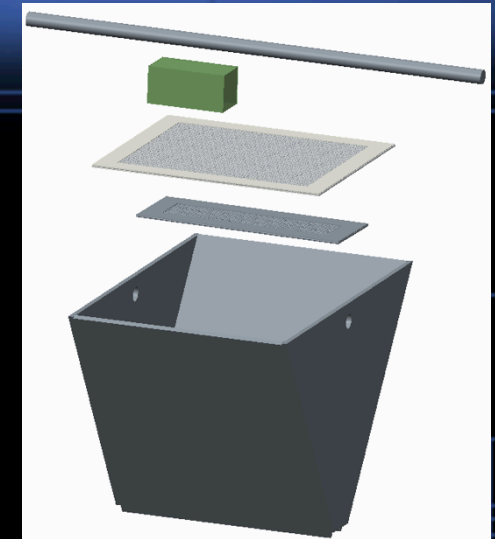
Exploded CAD drawing of the funnel with the meshes and Actuators.
